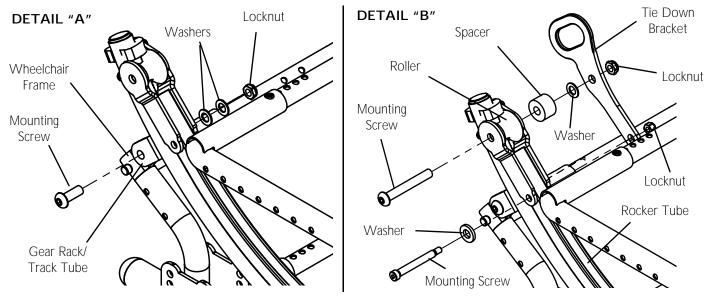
Install New Transport Brackets - 12-16 Inch Deep Seat Frames.
